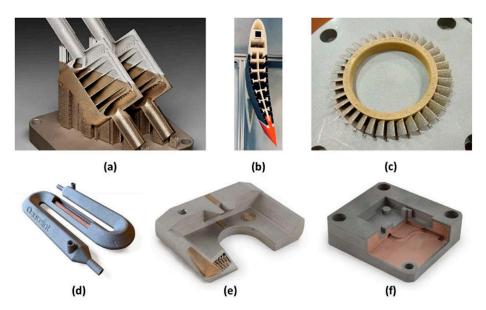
(a) Aerospace heat exchanger AM using stainless steel SS 316 and Inconel 718. (b) FGM wing section inspired by fishbone to adjust wing curvature. (c) FGM aircraft engine disk fabricated using 316L stainless steel and Cu10Sn materials. (d–f) Dual-metal components fabricated using copper on Aerosint recoater metal 3D printer. Reprinted with permission from Ref. [142] (open access).
